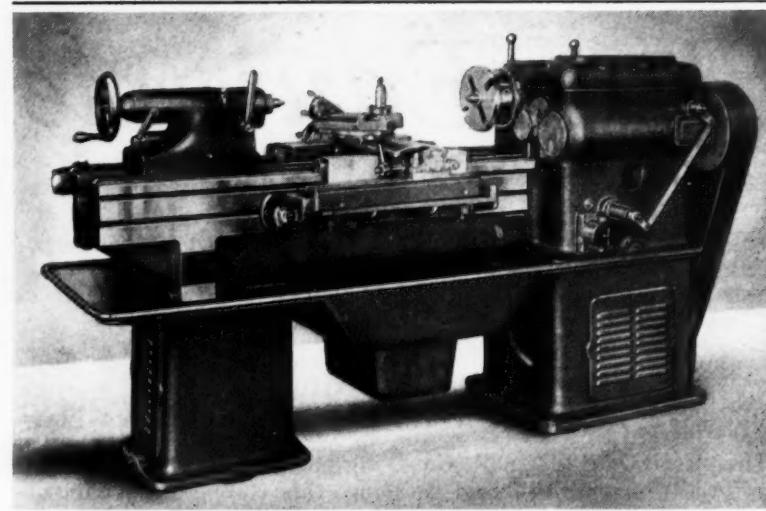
Rear View of Model C Lathe, Showing how the Headstock and Bed are Built to Give a Column Type Construction
